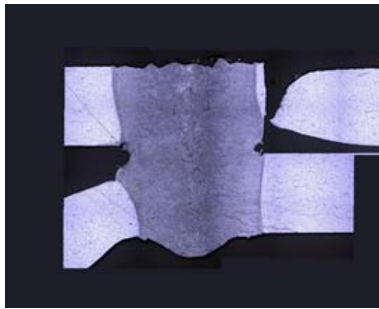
Tensile shear test results of laser Al alloys lap welding using Disk laser
